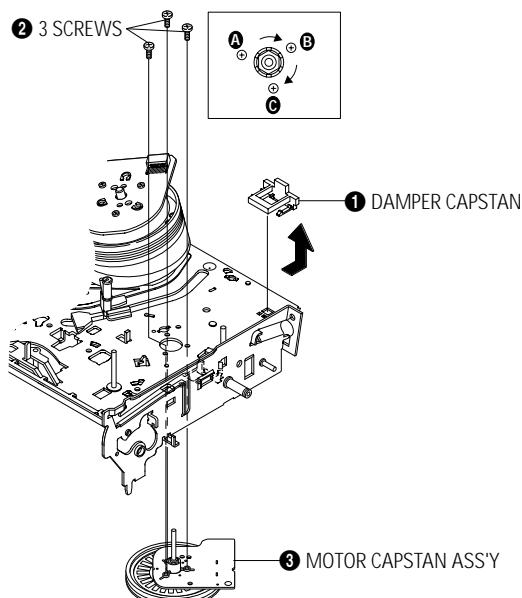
Damper Capstan,Motor Capstan Ass'y Removal
